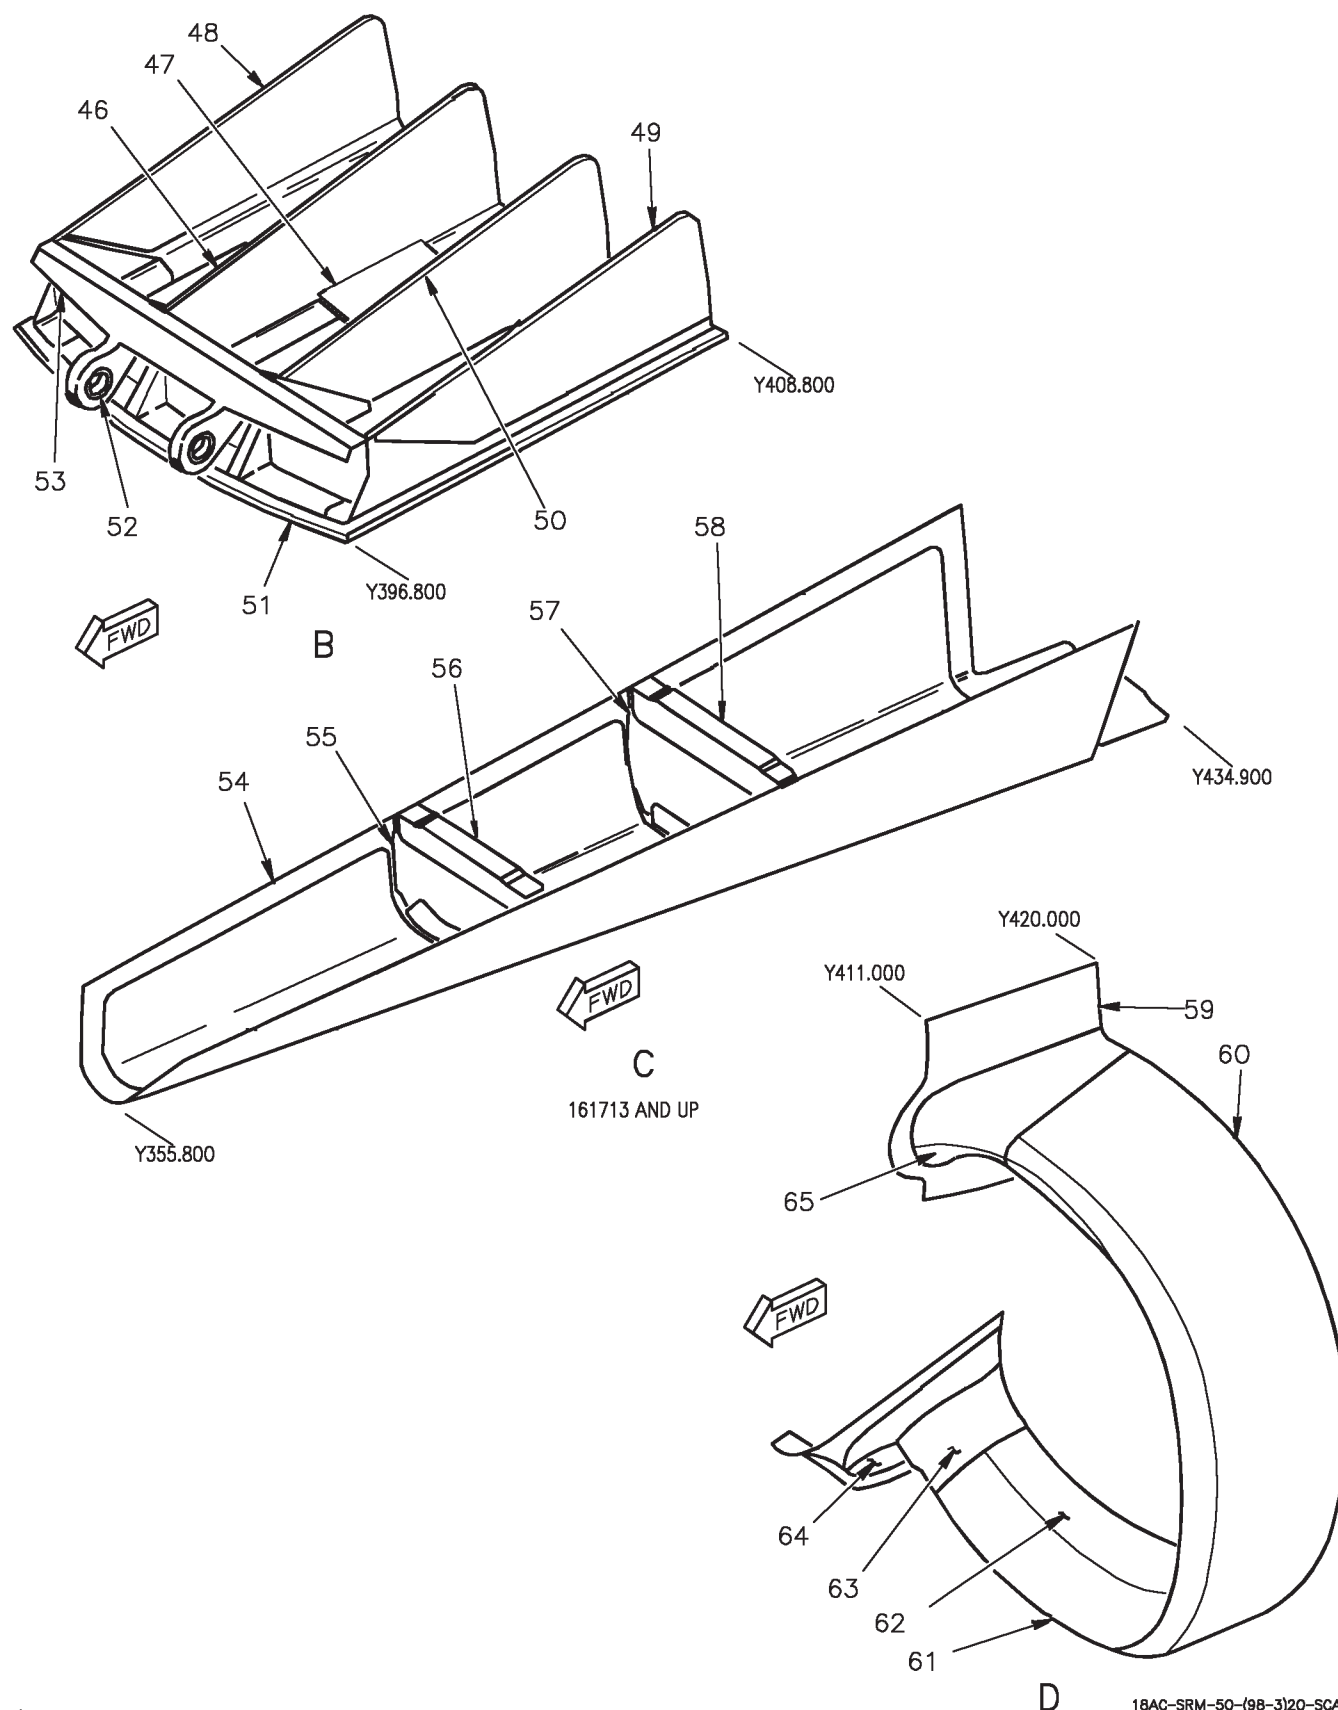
Air Inlet Skins, Doors and Covers (Sheet 3)
